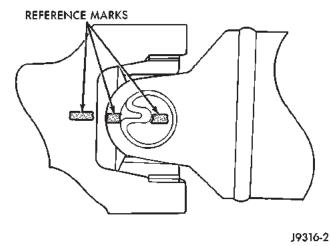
Align Propeller Shaft And Rear Axle Yokes
